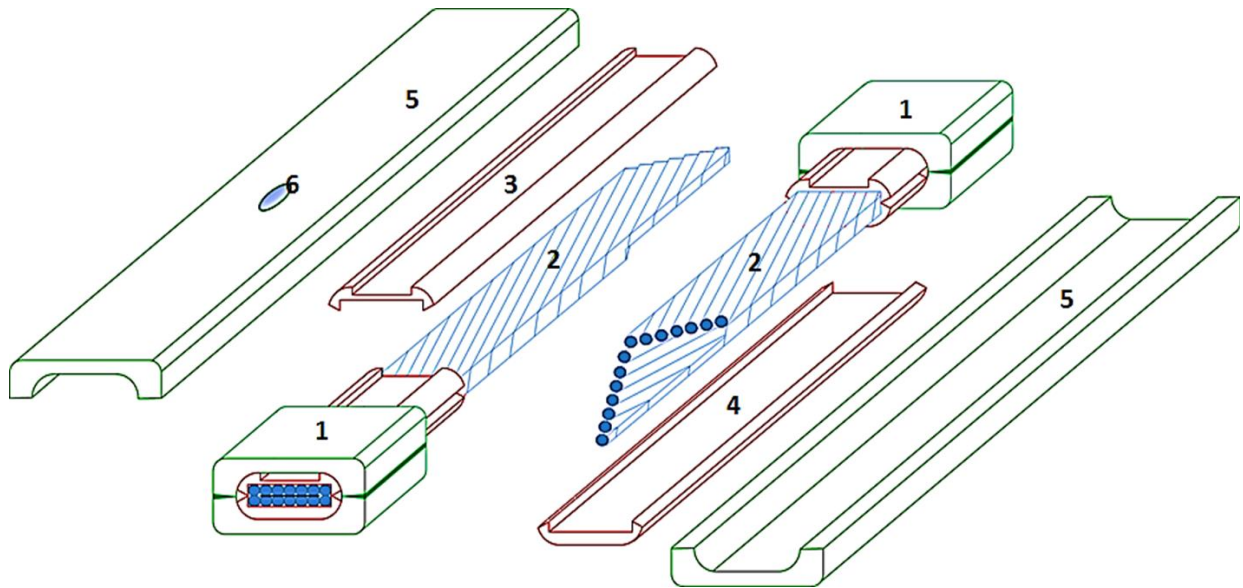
DEMO-EUROfusion Tokamak, TF coil joint, simplified exploded view:
